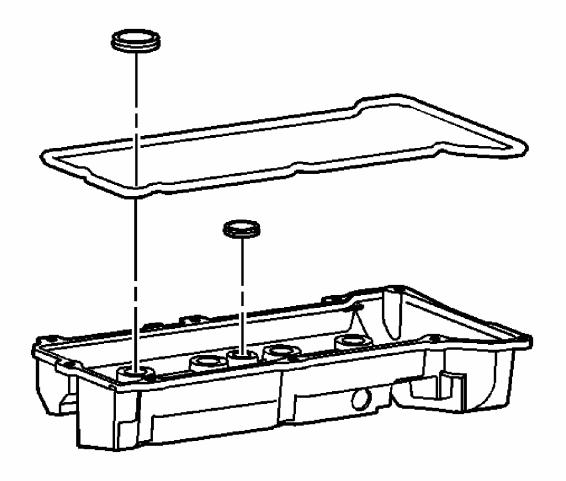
Identifying Right Camshaft Cover Gasket & Seals Courtesy of GENERAL MOTORS CORP.
